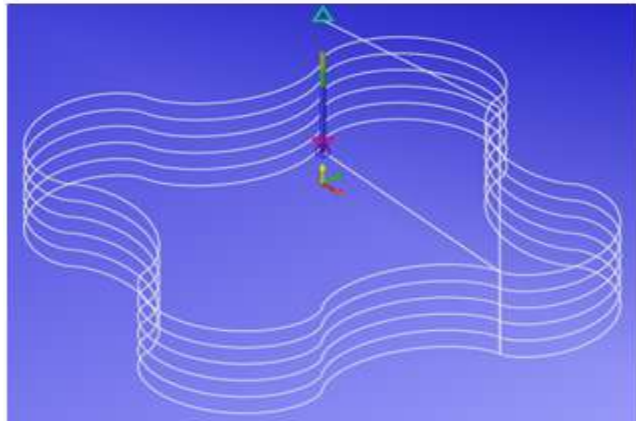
Four Teeth lobe pump rotor Tool –Path
